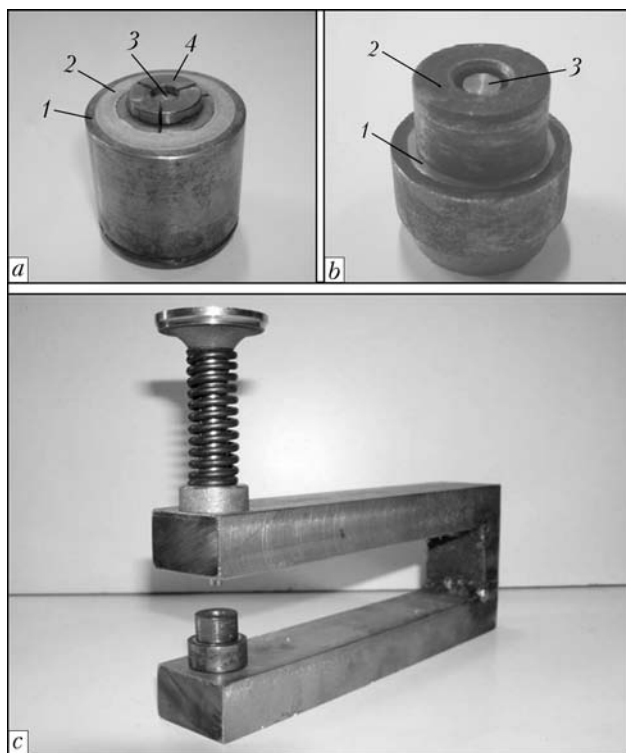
Devices for formation of joints by the punching method: *a* – opening clinch-die (1 – forming head of the collet type; 2 – anvil; 3 – elastic bushing; 4 – conductor); *b* – mountable-and-dismountable TOX-die (1 – forming bushing; 2 – adjustment gasket; 3 – anvil); *c* – appearance of clip
